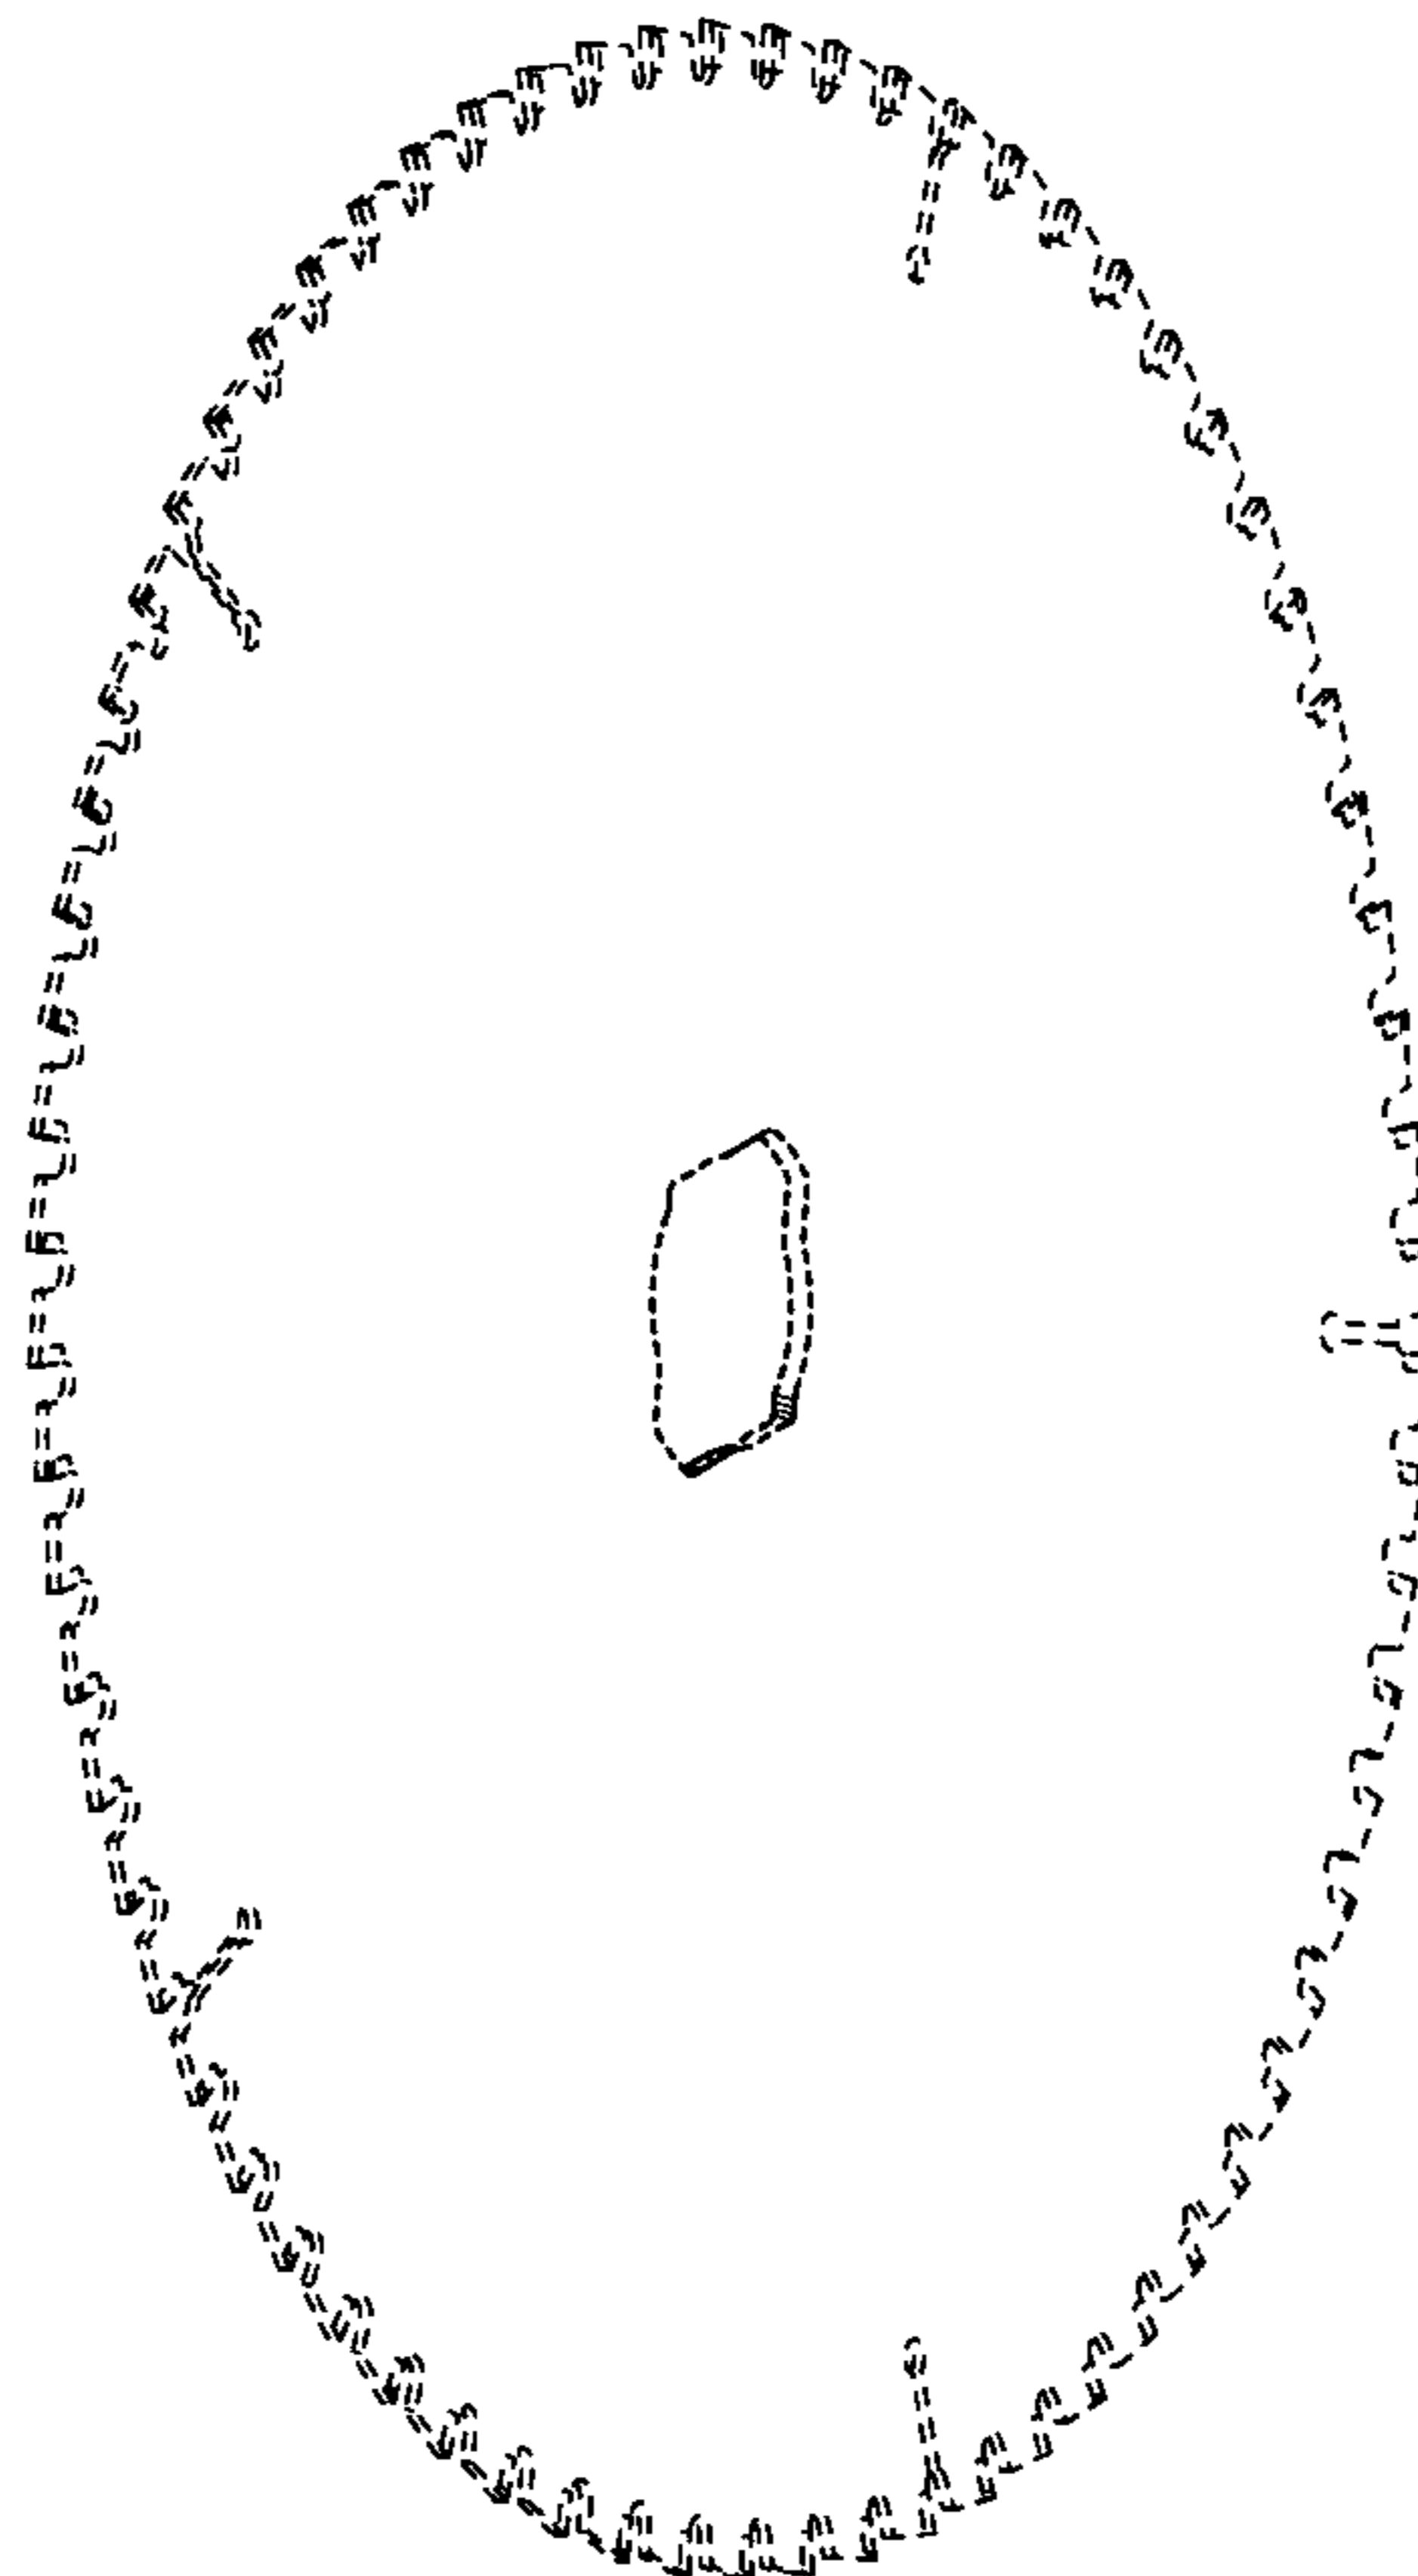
is a side elevational view thereof, taken from the side opposite that illustrated in FIG. 1;
